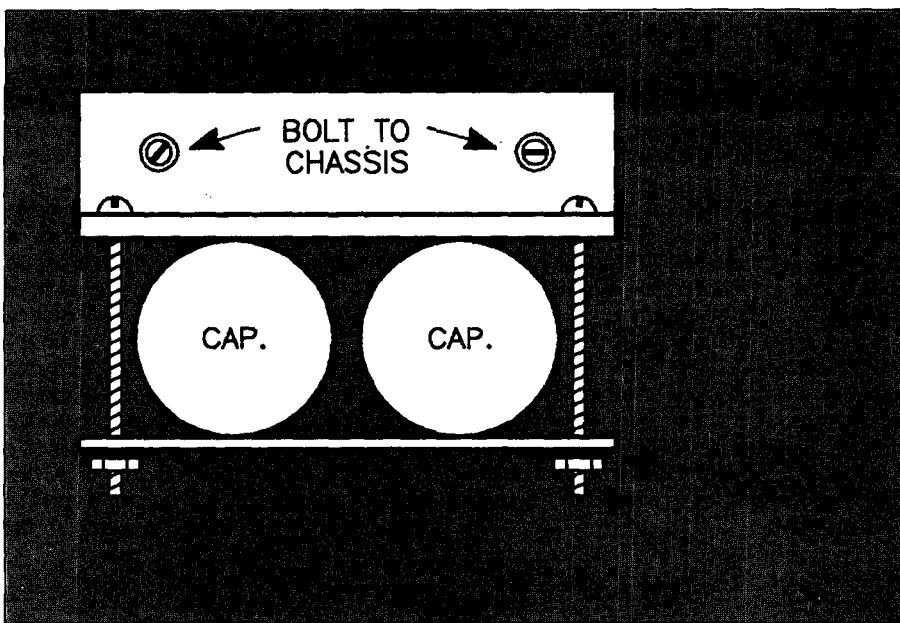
Suggested method of mounting the project. This is a top down view in which the pc board would otherwise obscure the arrangement seen here. The copper side of the pc board faces uppermost, allowing all interconnecting leads to be soldered directly to the copper tracks, or 'lands'.
